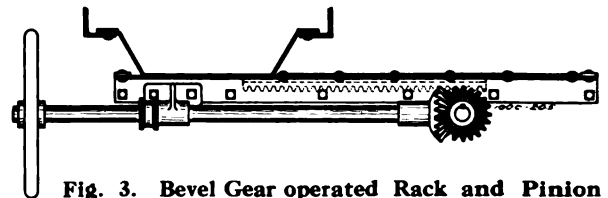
Bevel Gear operated Rack and Pinion Valve, horizontal operating shaft.
